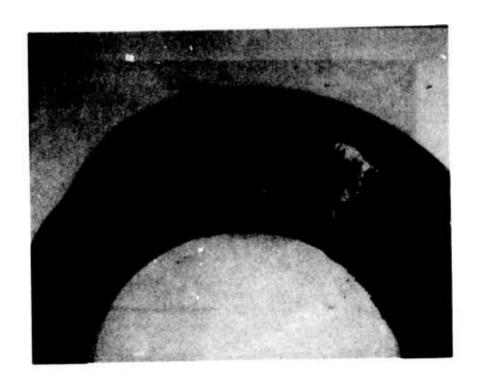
Crack - Roller/Gear Interface, First-Row Pinion.
